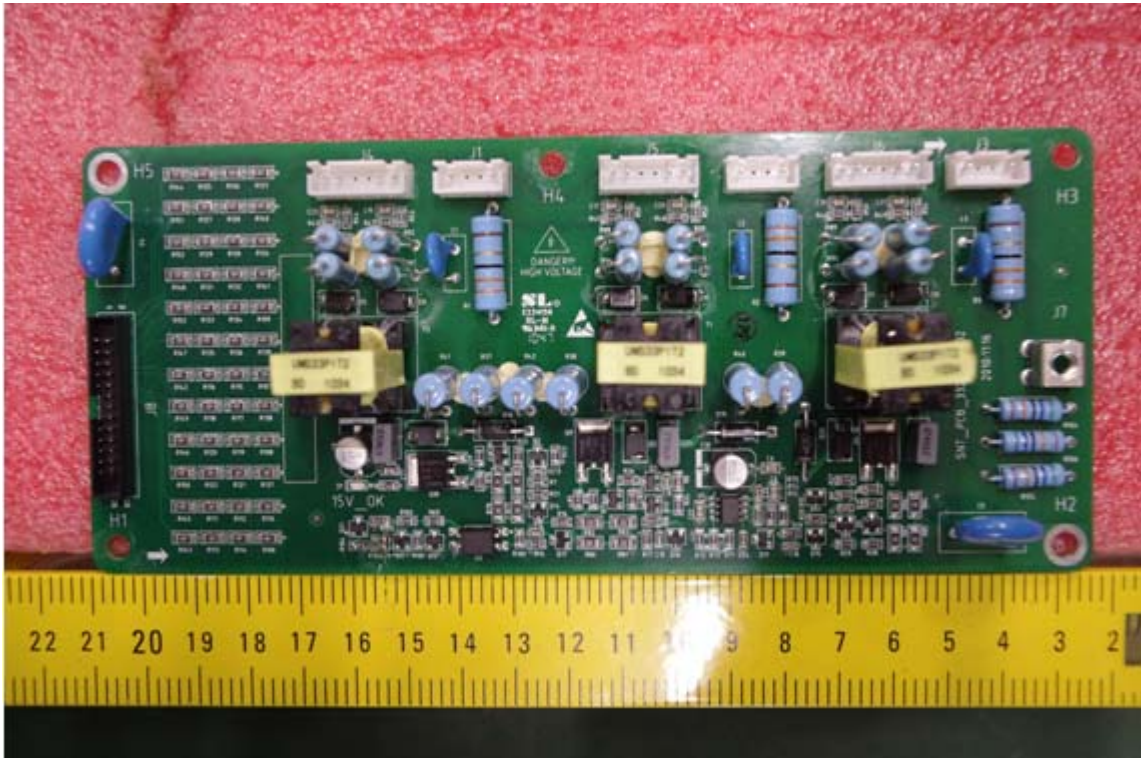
Board SNT_3320_PCB_CQ, components side view
